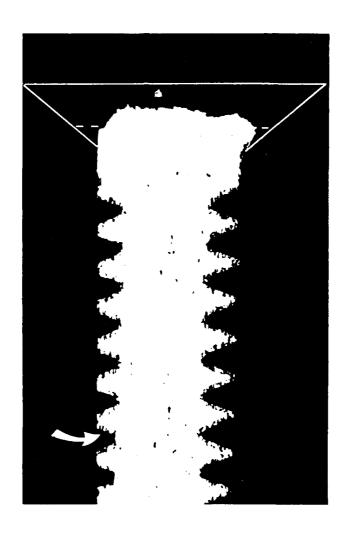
SECTION THROUGH BRASS SCREW OF POPPET VALVE FROM No. 3 CHAMBER (FIGURE 3, DETAIL A, ITEM 5) SHOWING THE EXTENT OF DAMAGE TO THE COUNTERSUNK HEAD (THE ORIGINAL SHAPE IS OUTLINED). AN AREA OF THE CORRODED THREAD (ARROWED) IS SHOWN IN FIGURE 9b
